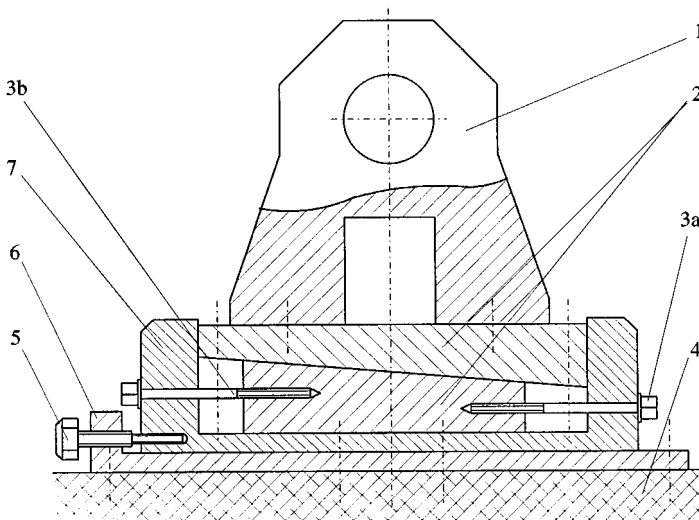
Shifting mechanism of bearing pedestal: 1-bearing; 2-vertical shift wedges; 3-vertical shift adjustment bolts; 4-foundation; 5-differential bolt for horizontal shift adjustment; 6-base plate; 7-horizontal shift unit.
